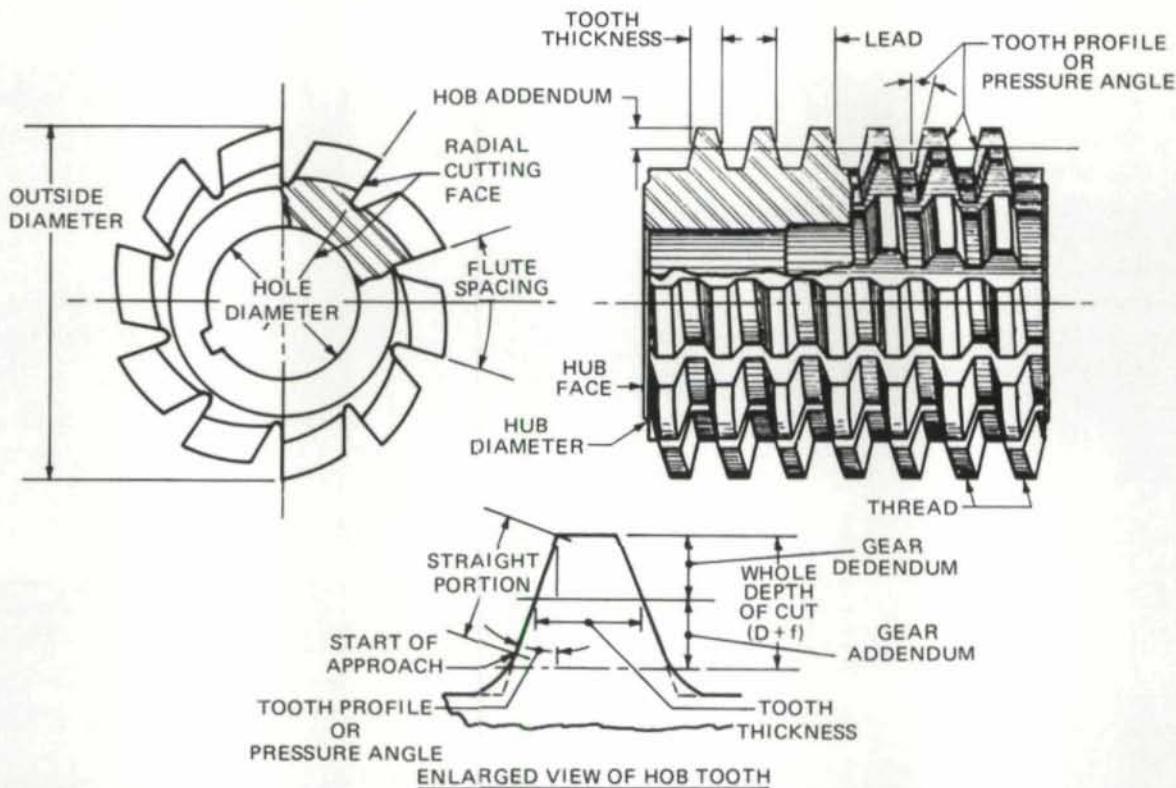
A tool with teeth in basic rack form, which cuts gear teeth from a solid blank, is a hob. Details of a typical hob for production of involute tooth form gears are shown here.
